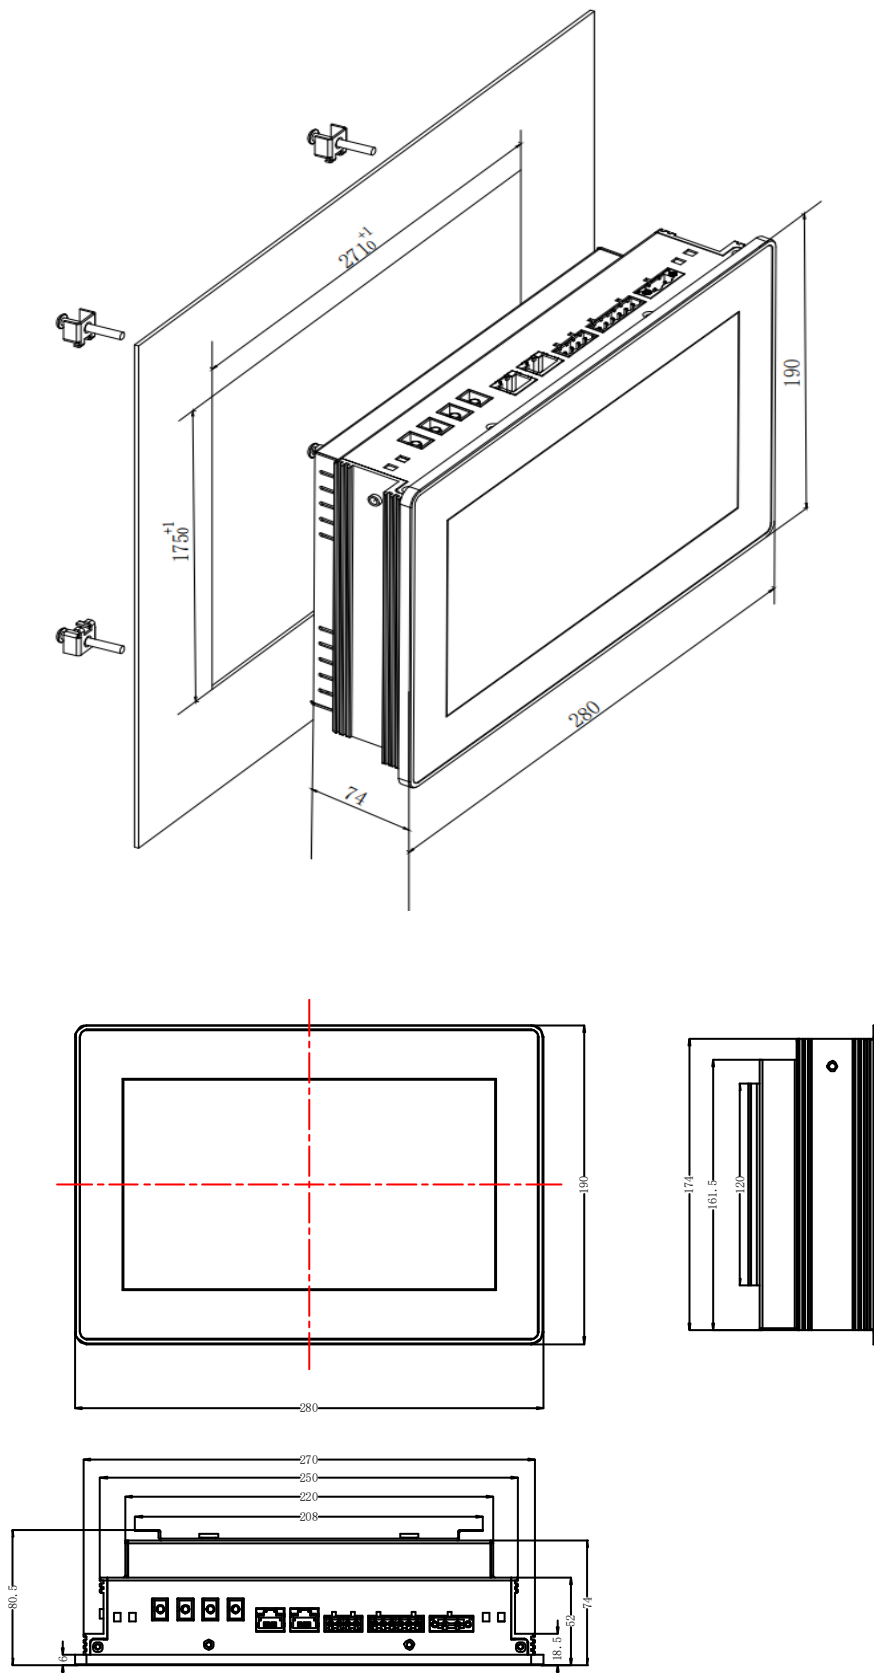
Panel-Mounted Embedded Installation Dimensions
